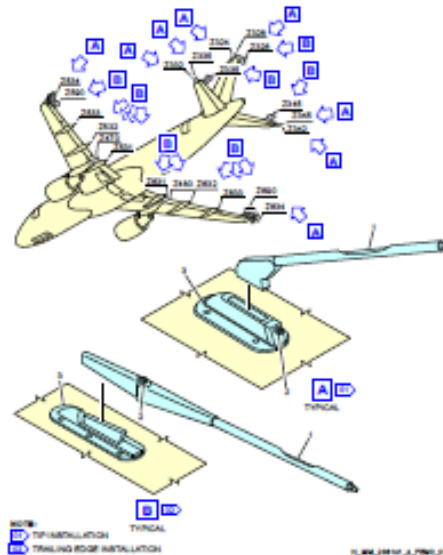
C (SHEET 1) - Static Discharger - Location and Detail
